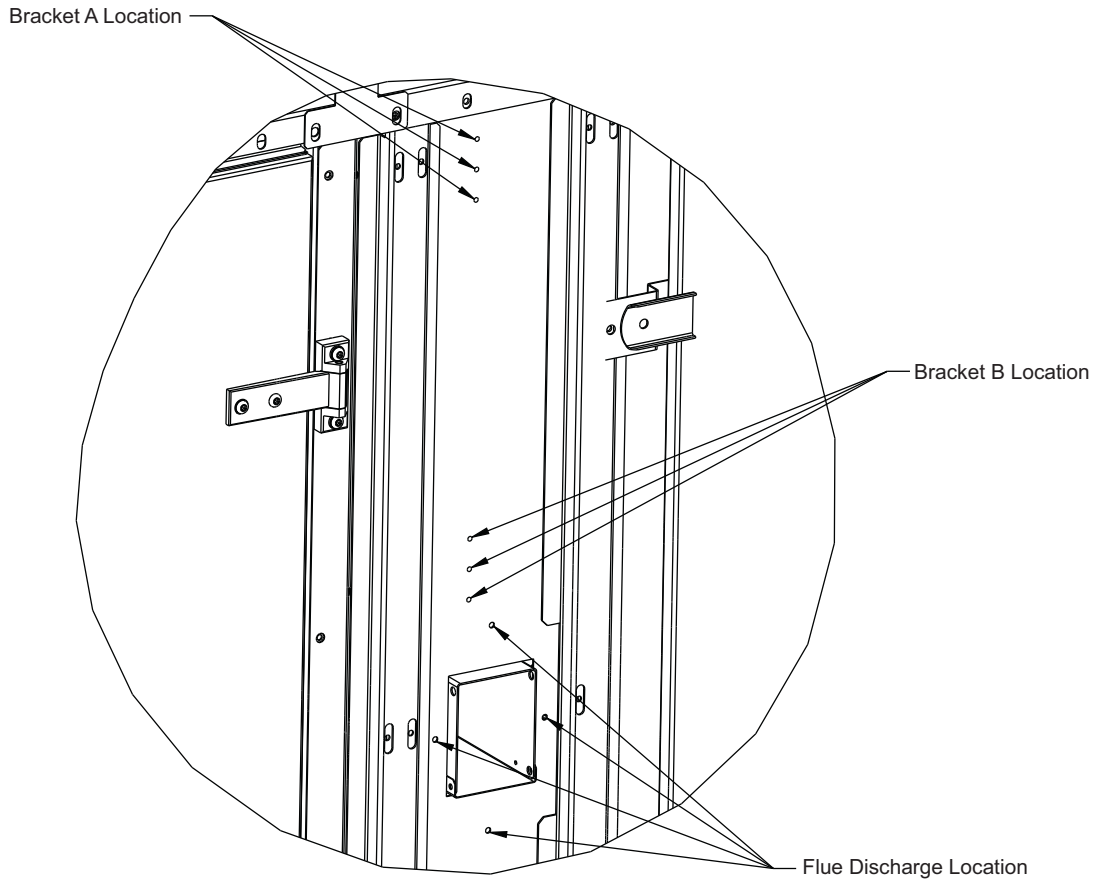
Flue Discharge Deflector Mounting Position - 27.5-50 Ton Low Heat (Detail View)
